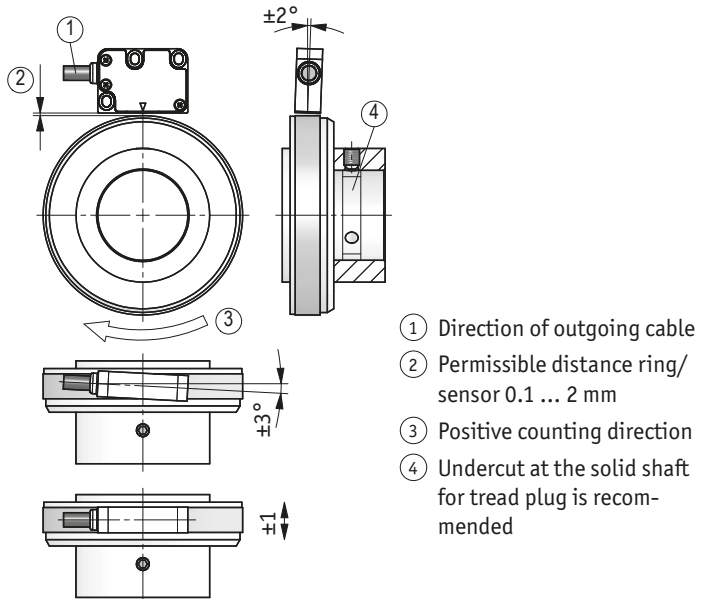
Definition of the counting direction and mounting of sensor/magnetic band ring / magnetic ring, clearances, tolerances
